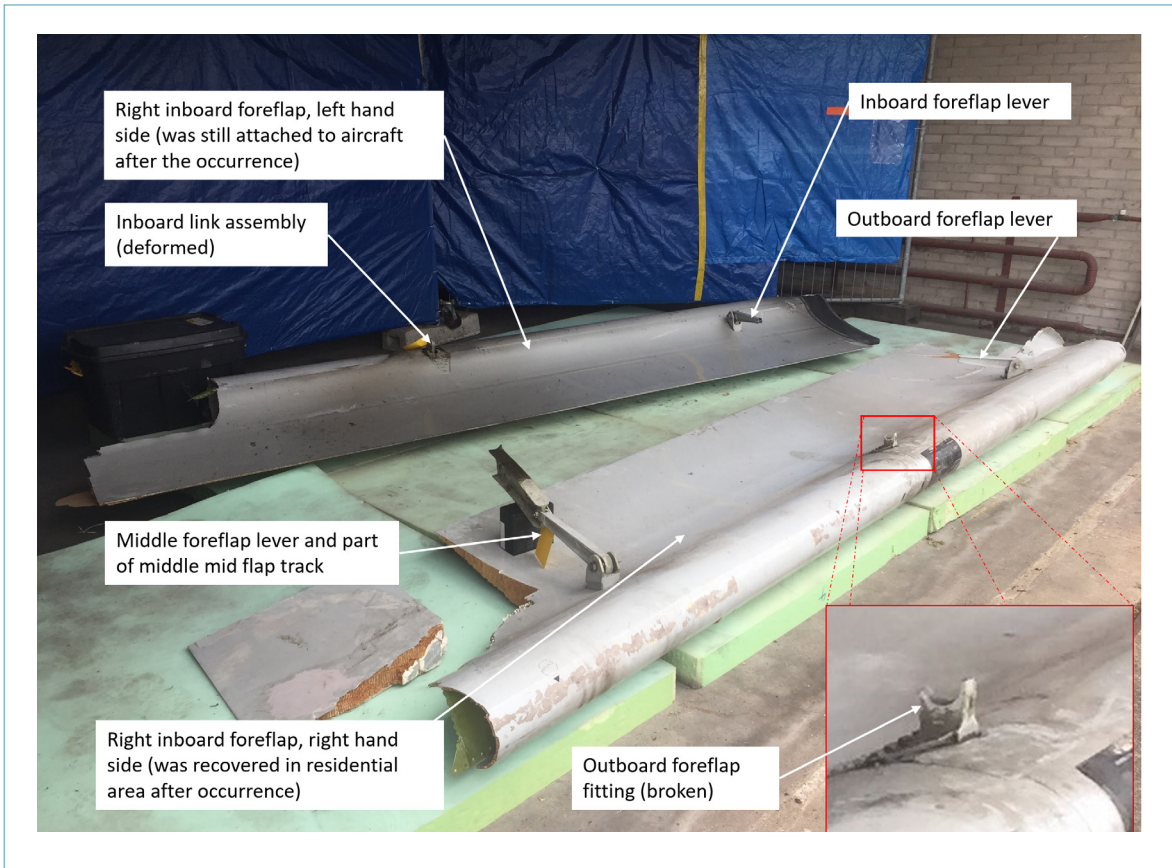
Broken parts PH-CKA's right wing inboard foreflap. (Source: Dutch Safety Board)
